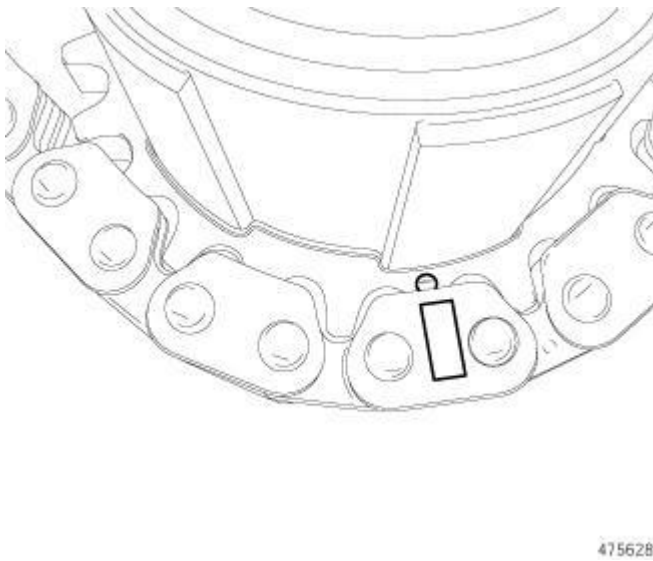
Aligning Timing Chain & Crankshaft Sprocket Marks
